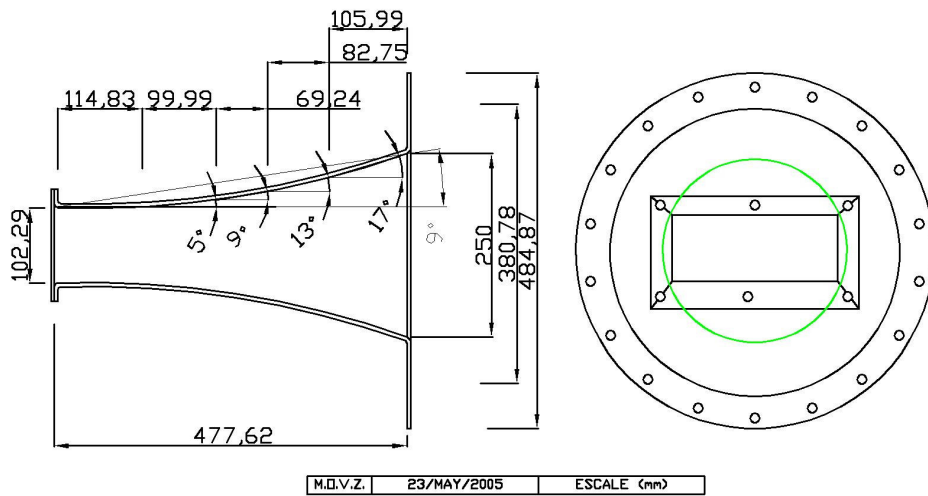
Sketch diagram of the cascade blade section design. Lateral View (left figure), Plan View (right figure).
